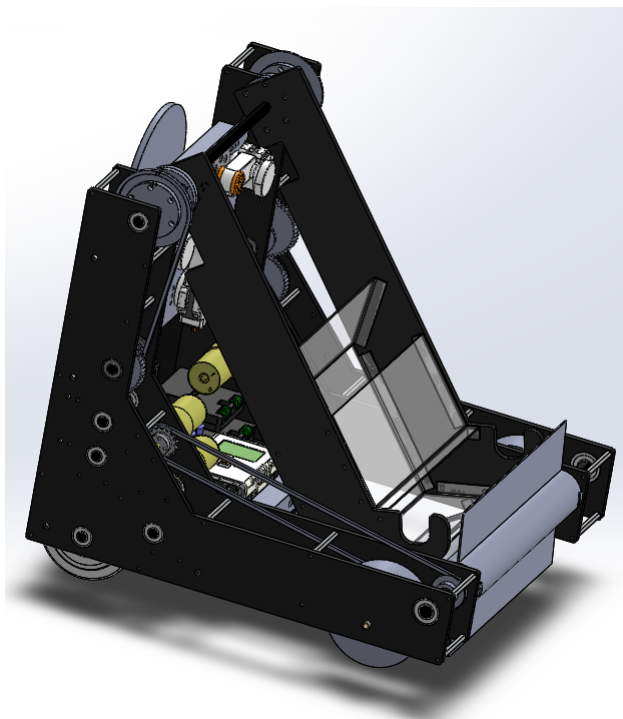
This is the first revision of our Solidworks. We can see the block acquisition device that is essentially a roller that will inhale blocks into our robot
